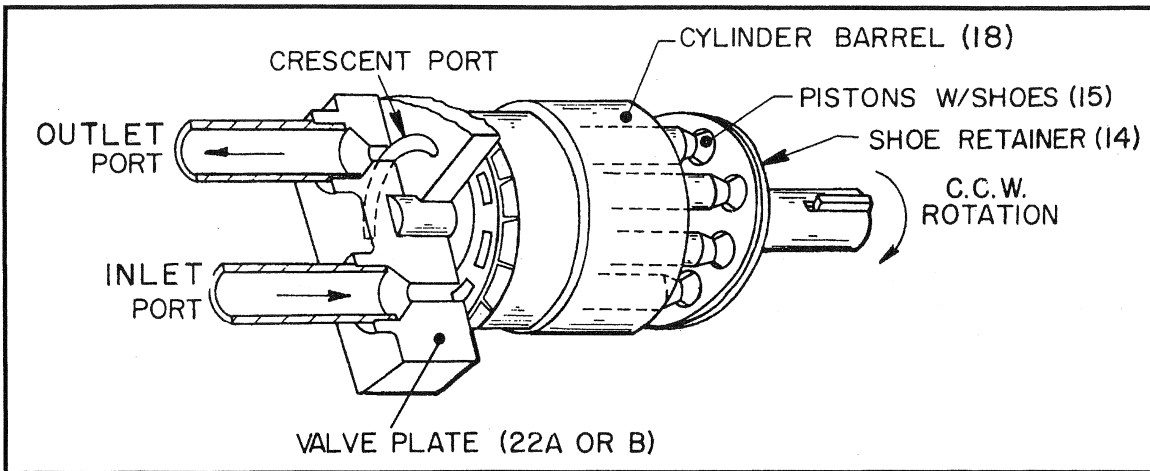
Type "PVWH" Pumping Mechanism (511783).
